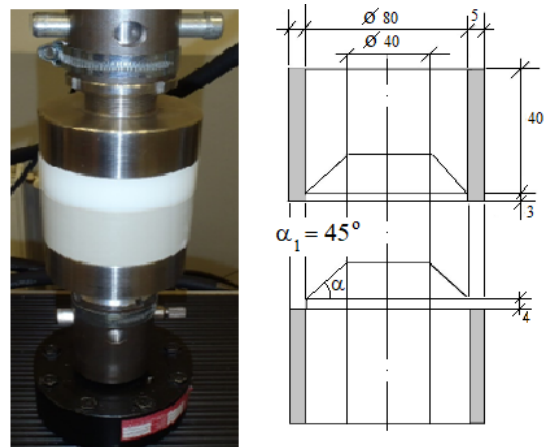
A section of the test stand and cross-sectional drawings of the compressed rings
